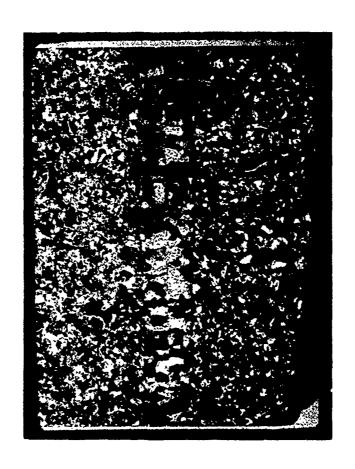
MACROGRAPH OF WELD JOINT FROM MURDOCK WELDED PLATE MR-2 (MAG 3X)
